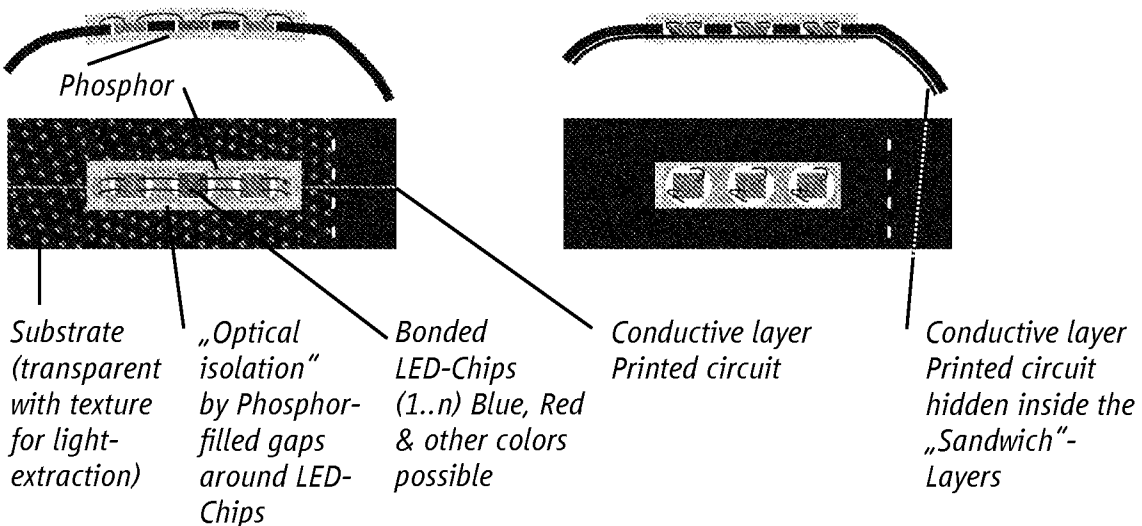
Method for making an E27 A55-Replacement Lamp using CIFB assemblies
